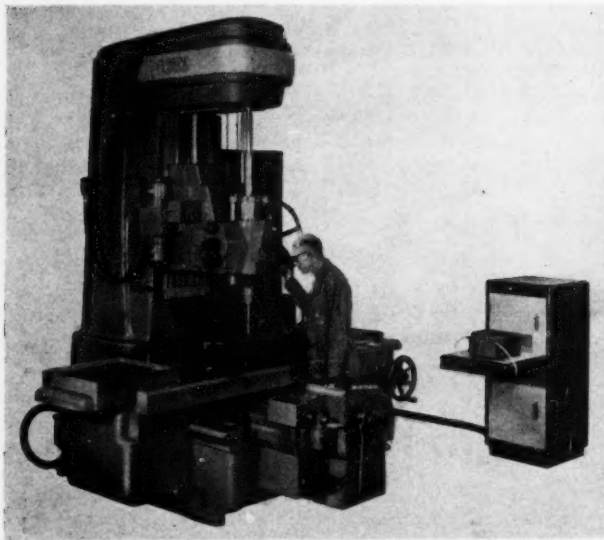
Fosdick Fosmatic Tape-controlled Jig Boring Machine
